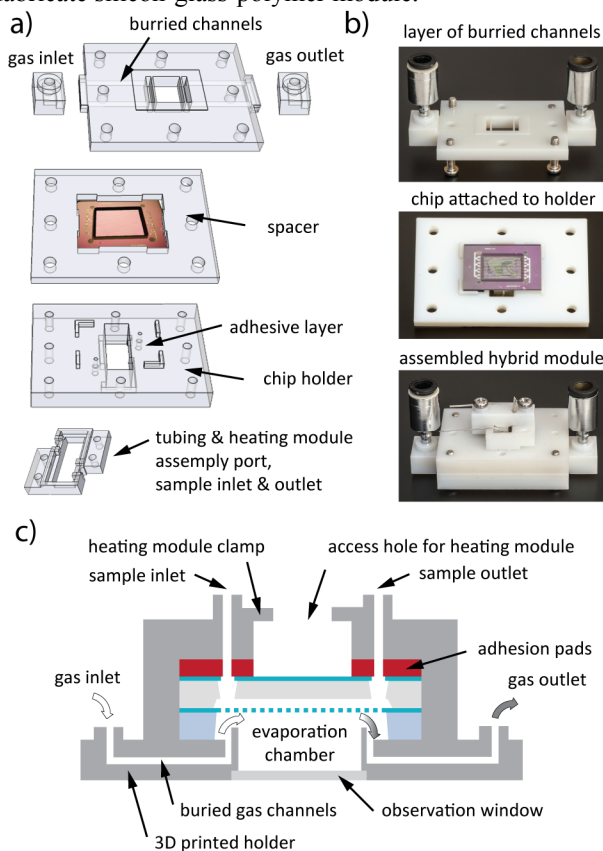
a) Schematic representation and b) photographs of the 16-line concentrator chip assembled with 3D printed elements. c) Cross-sectional view of hybrid module.
